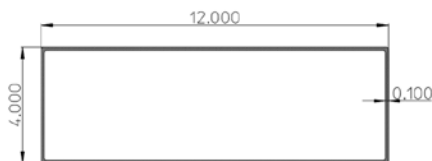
AA6063 section extruded using a 9 inch billet container press (values in inches). The profile has a nominal weight of 3.7 lbs/ft and extrusion ratio of 23.
